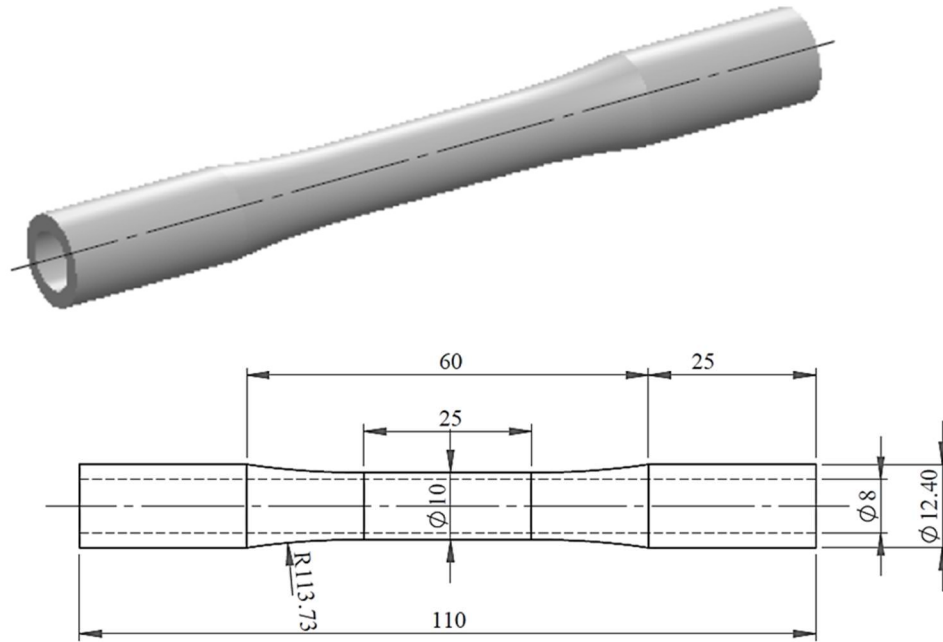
Tubular specimen for cyclic torsion and multiaxial fatigue tests (All dimensions in mm).
